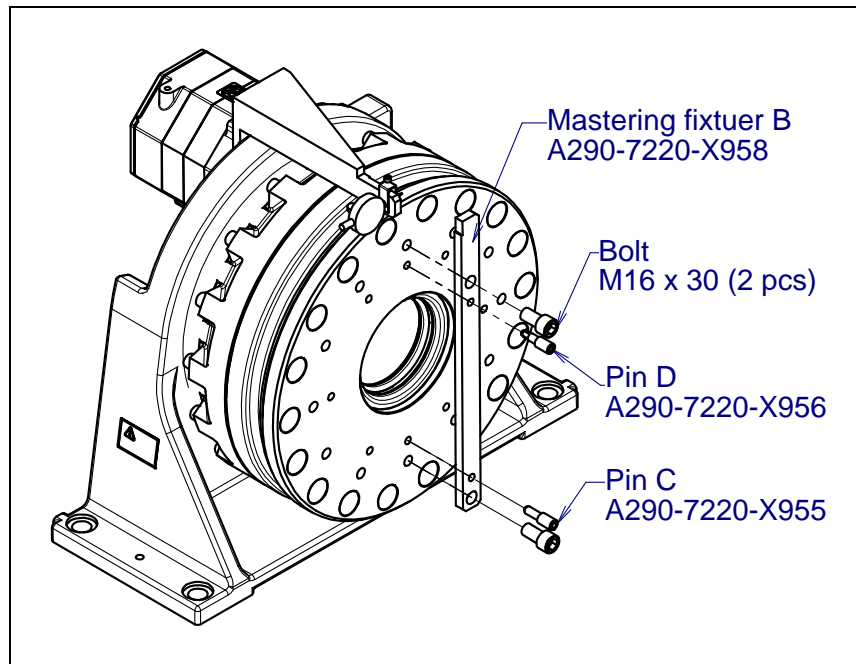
(d) Attaching the mastering fixture to the 1-axis positioner (1000kg/1500kg payload (Hollow type))
